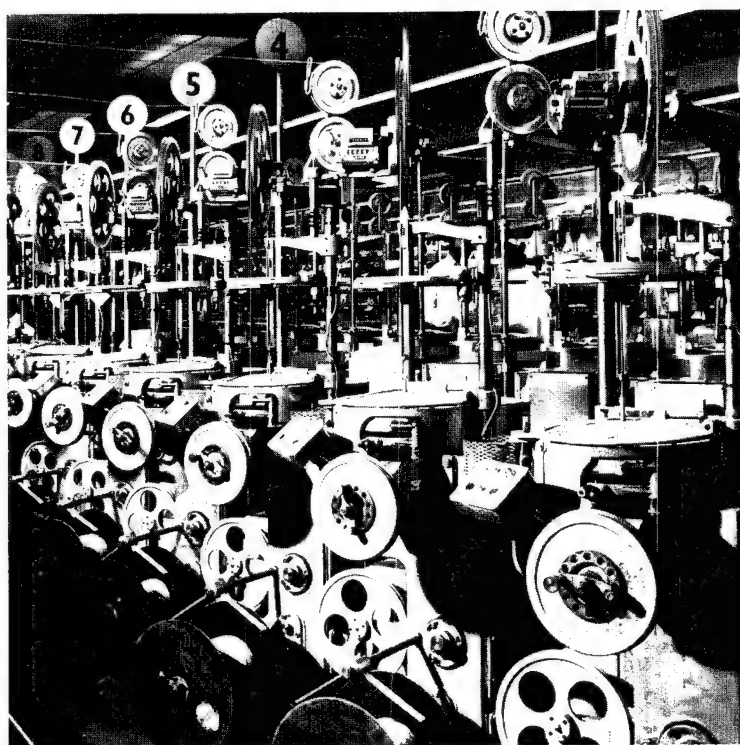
A group of helical-wrap insulating machines at the STC cable plant in North Woolwich, England.
